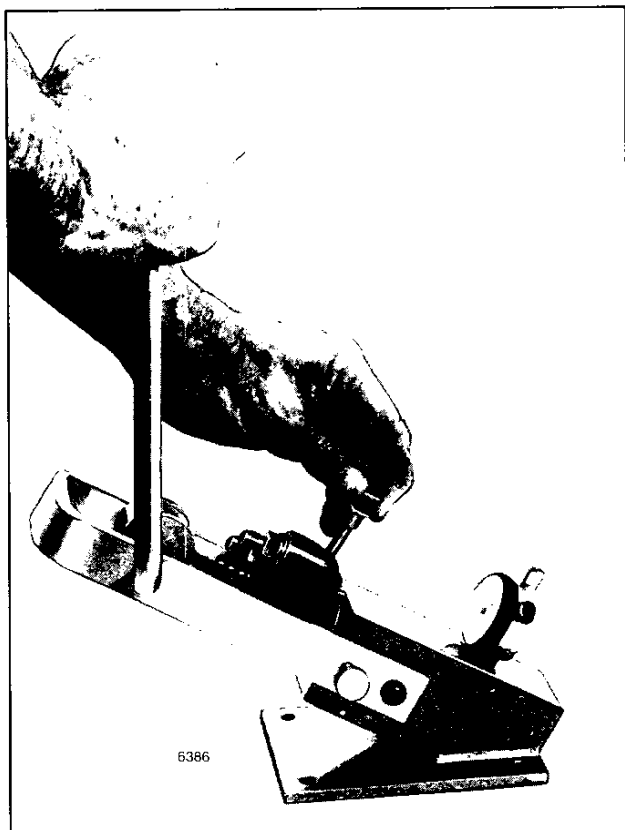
Checking Rack for Freeness in Tester J 29584
